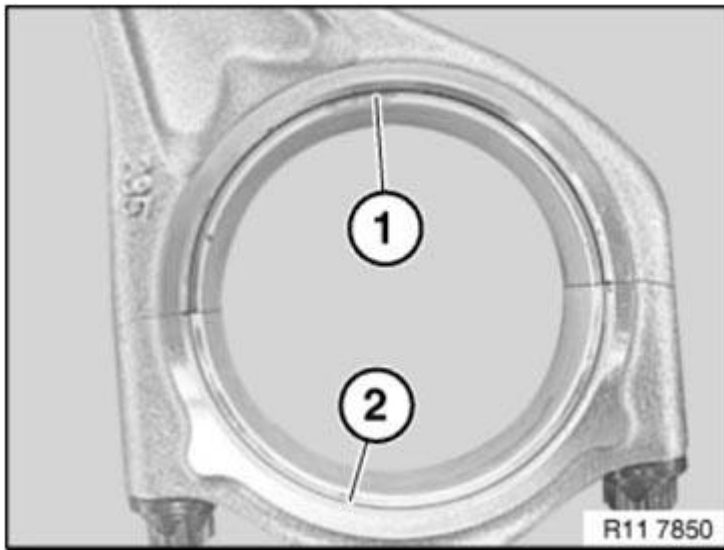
Identifying Blue Bearing Shell And Red Bearing Shell
